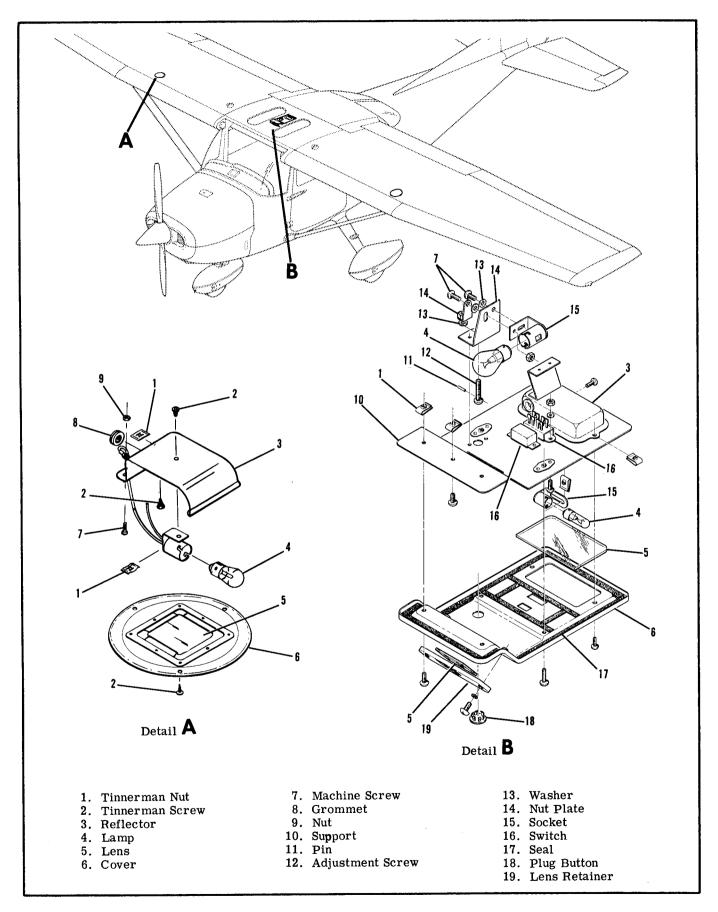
Instrument, Dome and Courtesy Light Installation.
